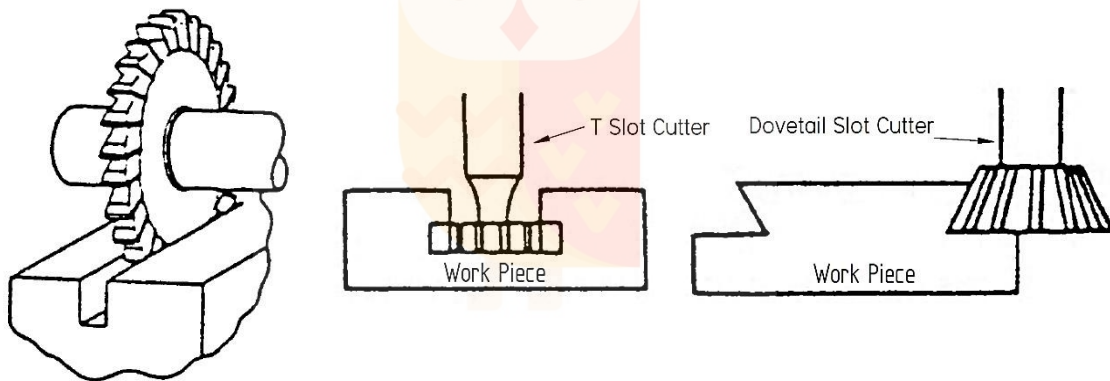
Simple Slotting of key way using side milling cutter
